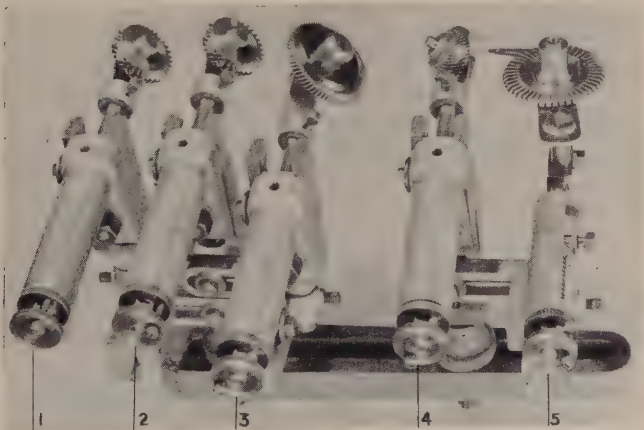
Single plush with double backing and jack presser: (1) plush feeder; (2) plush feeder; (3) clearing bur; (4) sinker bur; (5) jack presser.
